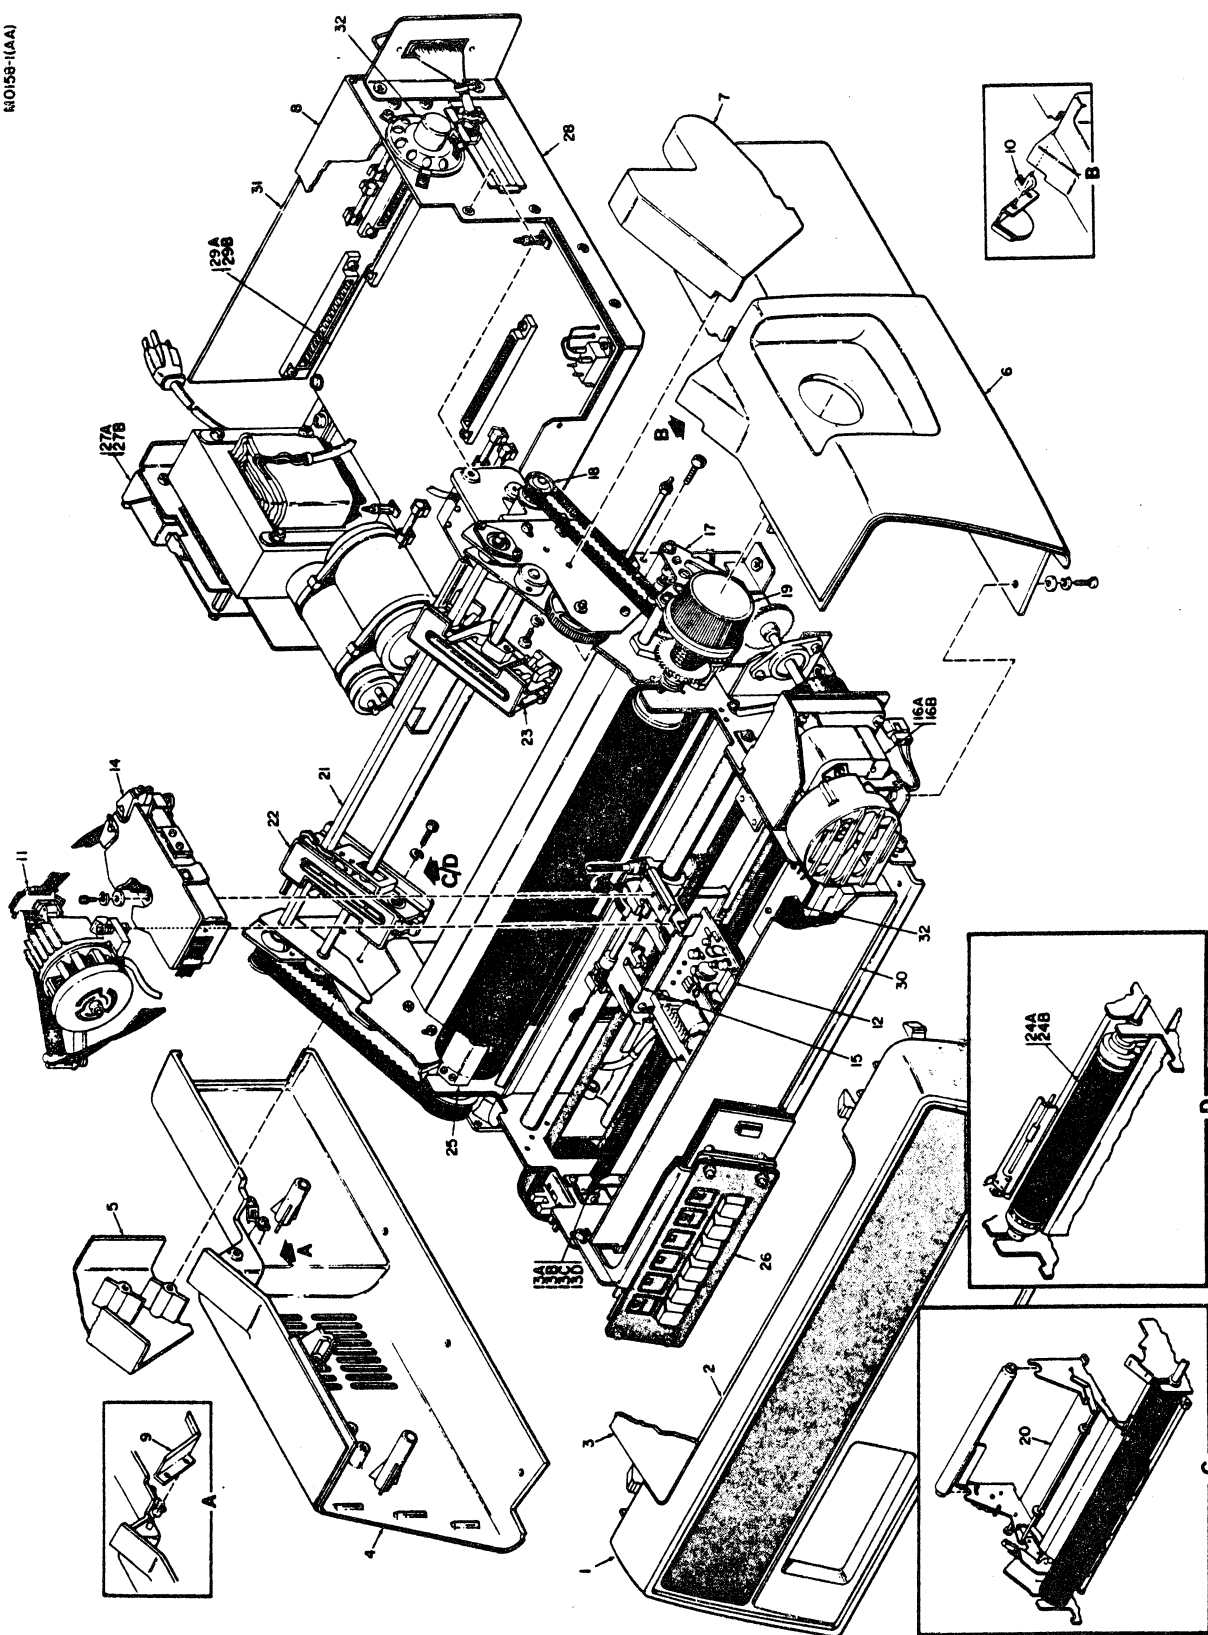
PRINTER SUB-ASSEMBLIES, MODEL 780
